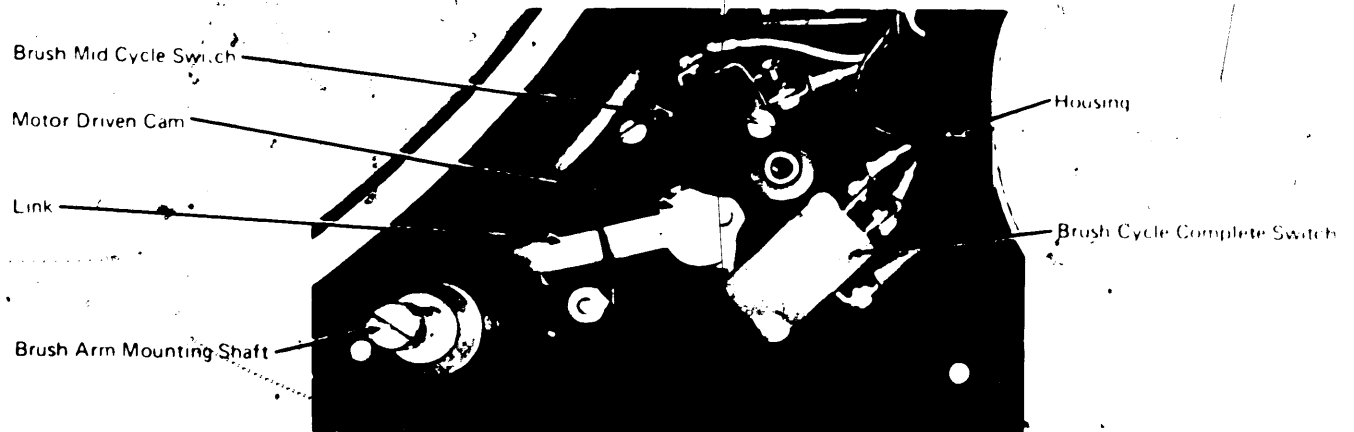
Linkage Mechanism for Disk Cleaning Brushes [08429]
